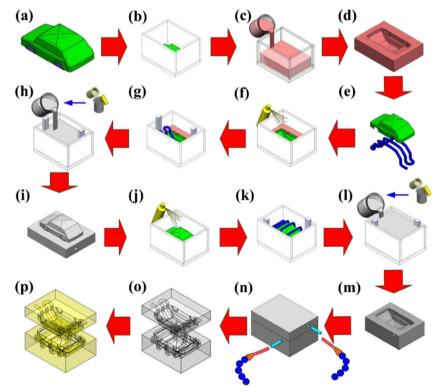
Process layouts for fabricating a wax injection mold with conformal cooling channels. a Preparation of a master model. b Placing the master model into the mold frame. c Preparation of intermediate mold materials and casting. d Intermediate mold. e Designing a conformal cooling channel of core insert. f Placing the intermediate mold and master model into the mold frame. g Placing the positioning fixture and the conformal cooling channel for core insert into the mold frame. h Preparation of Al-filled
